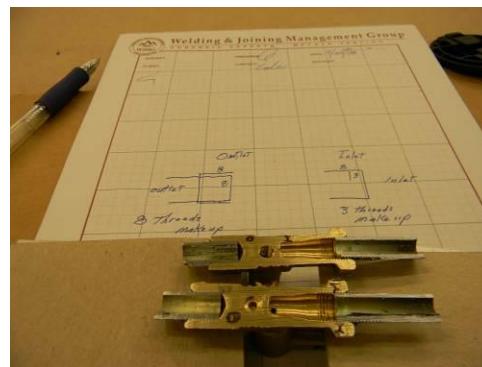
Cross-Section - Exemplar Torch Inlet Connection - 3 Inlet Threads Engaged, 8 threads available.
